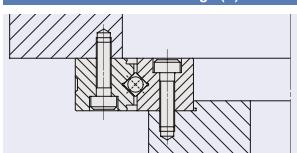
Example of direct mounting to the mating surface of Mounting Holed Type High Rigidity Crossed Roller Bearings (V)
